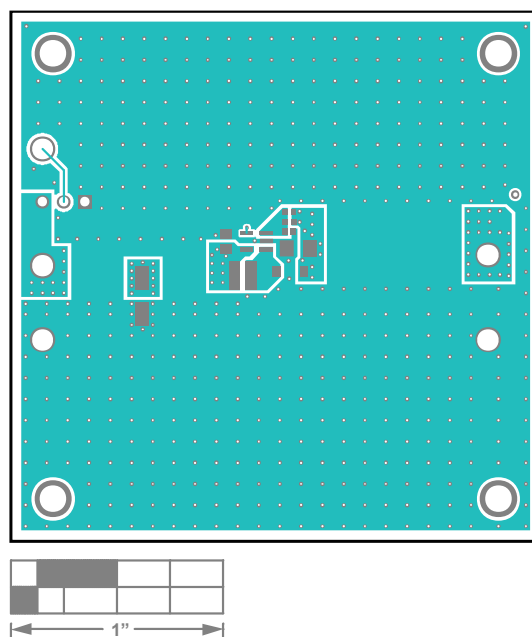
EVAL-ADPL21504-AZ Evaluation Board PCB Layout—Layer 1
